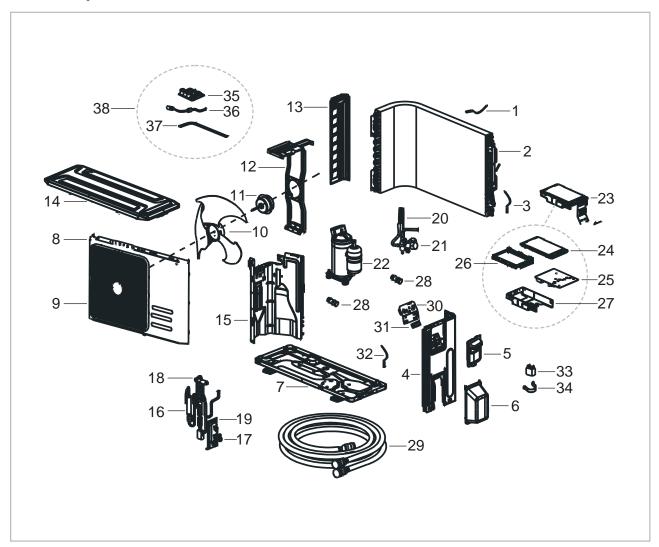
Exploded view of the unit BL 263-353 DC AT
